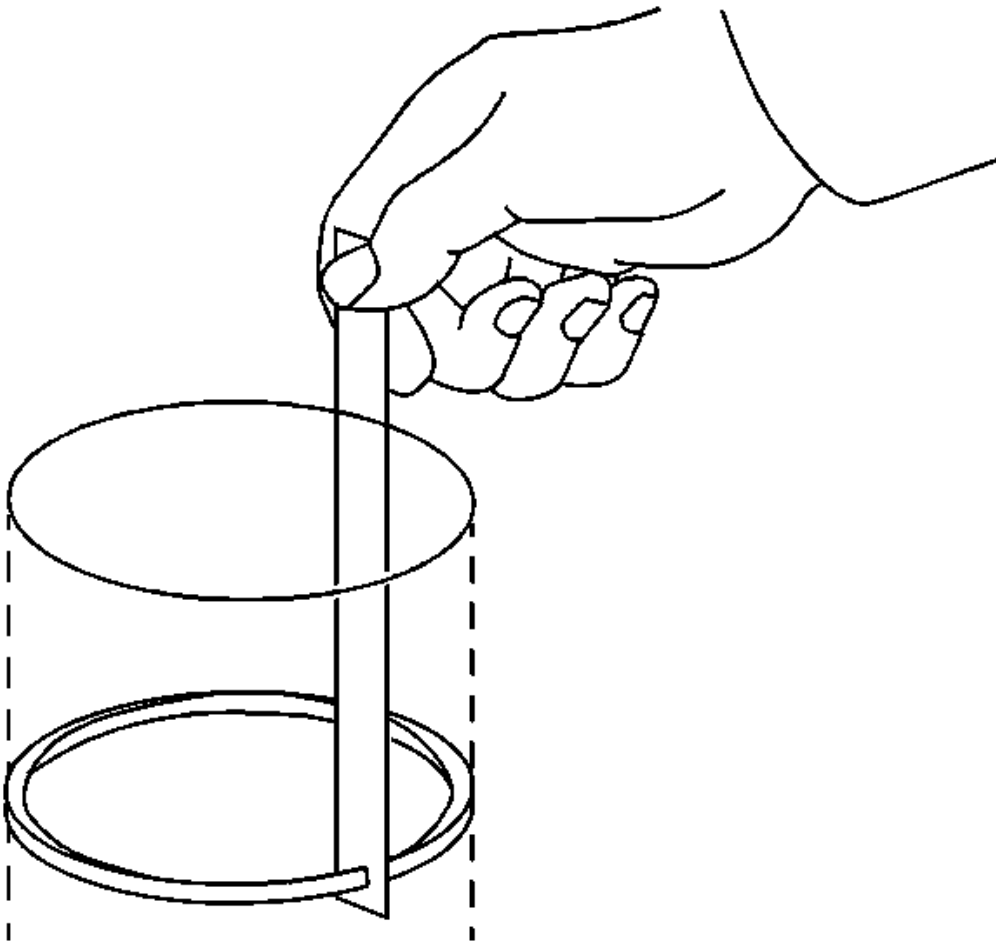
Measuring Piston Ring End Cap With Feeler Gages
